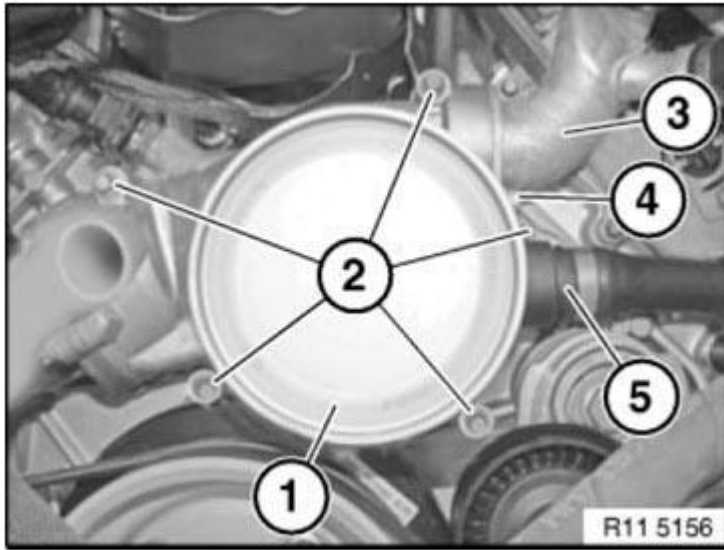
Identifying Pipe, Screws And Coolant Hose
